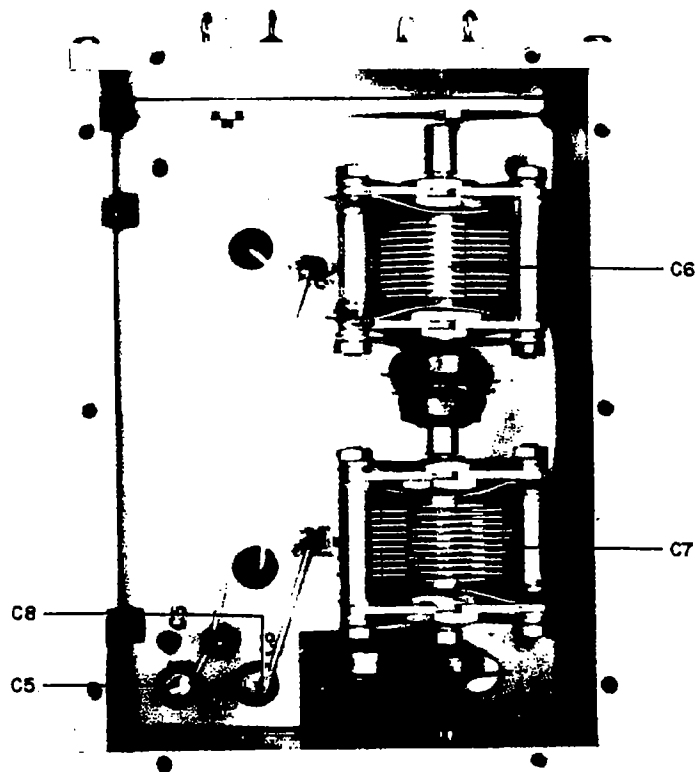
Type 7749 LO Tuning Assembly (A18A1) Top View, Component Locations
